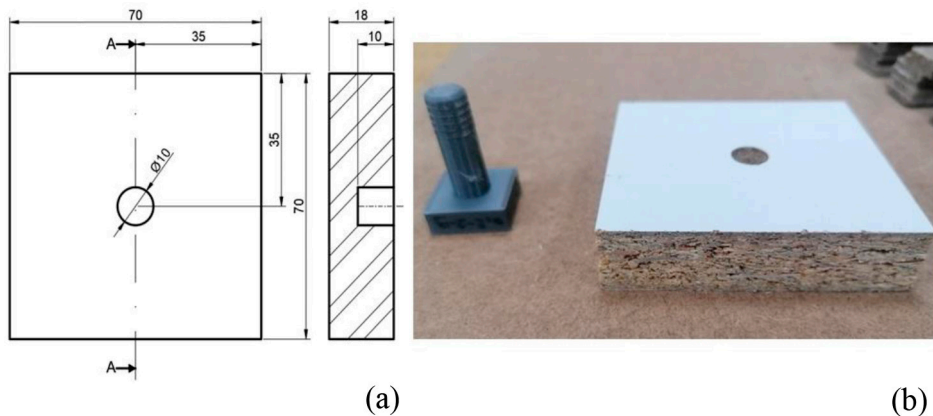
(a) Dimensions and (b) configuration of the test samples.
